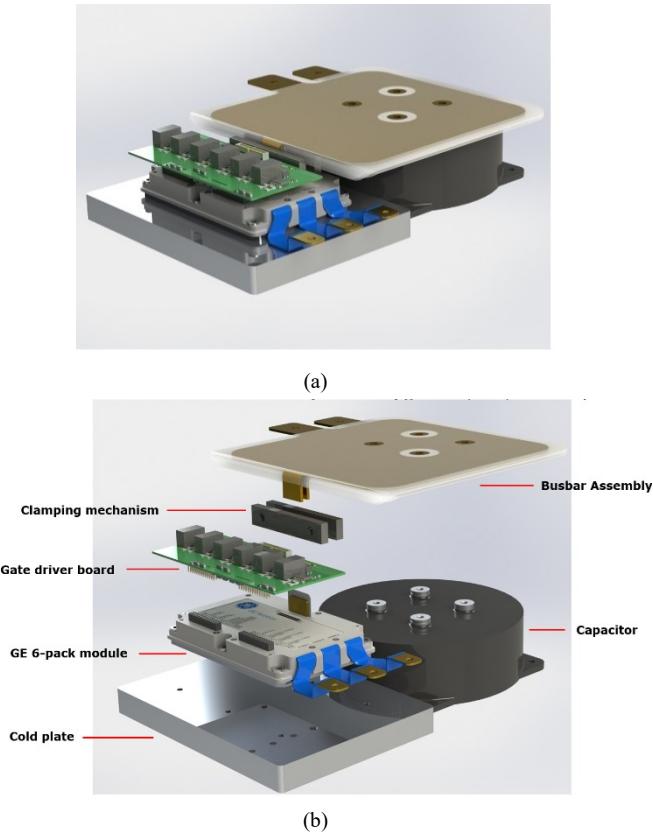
(a) Inverter power stage assembly. (b) exploded view showing the components of the assembly.
